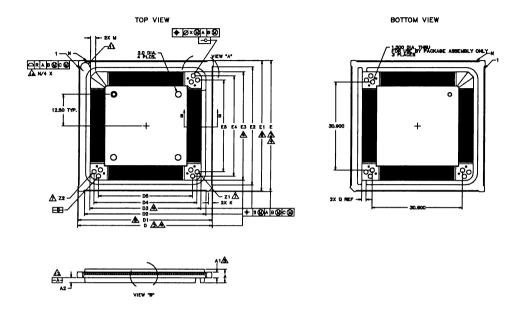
Molded carrier ring QFP, 256-lead customer package outline (2 of 4)
